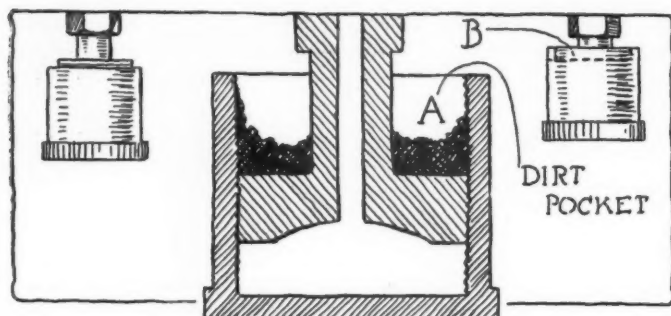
How a dirt pocket is formed by screwing up the grease cup too far
